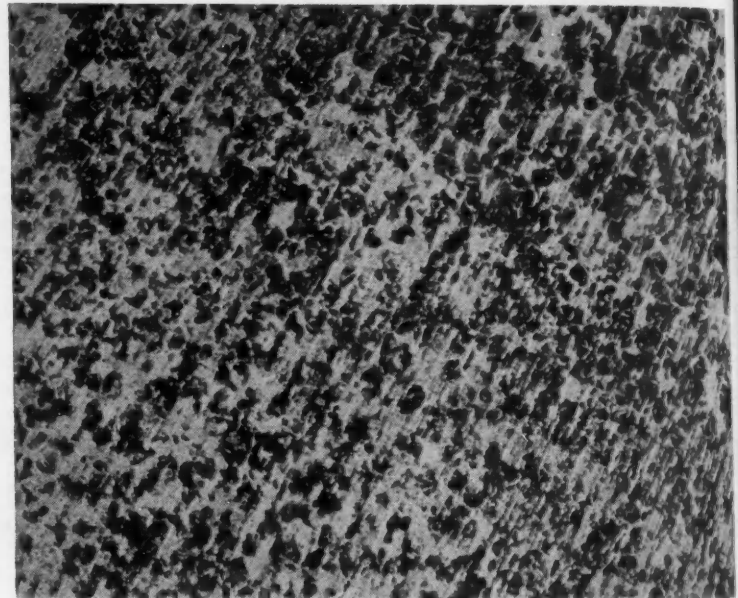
Faxfilm impression of the same surface shown in Fig. 6 (a coil spring peened with cut-wire shot)
